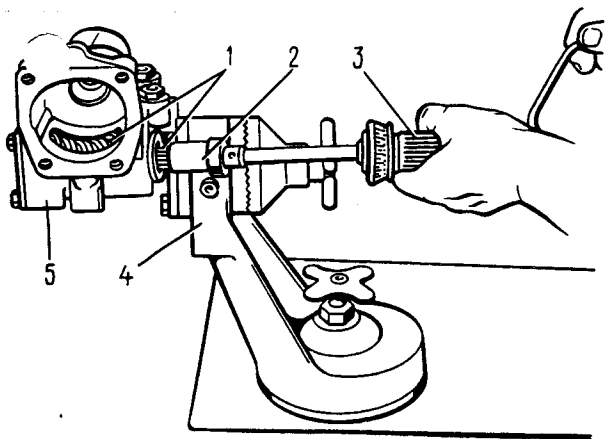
Worm Friction Torque Dynamometer Check:
